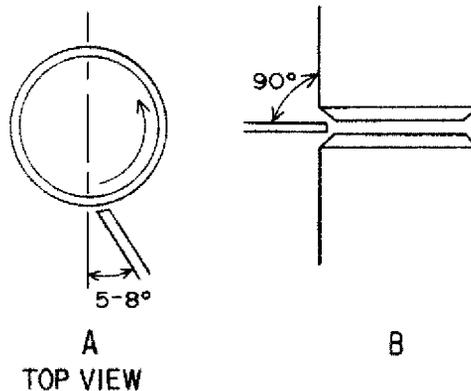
Correct electrode angle for welding the tack weld.
